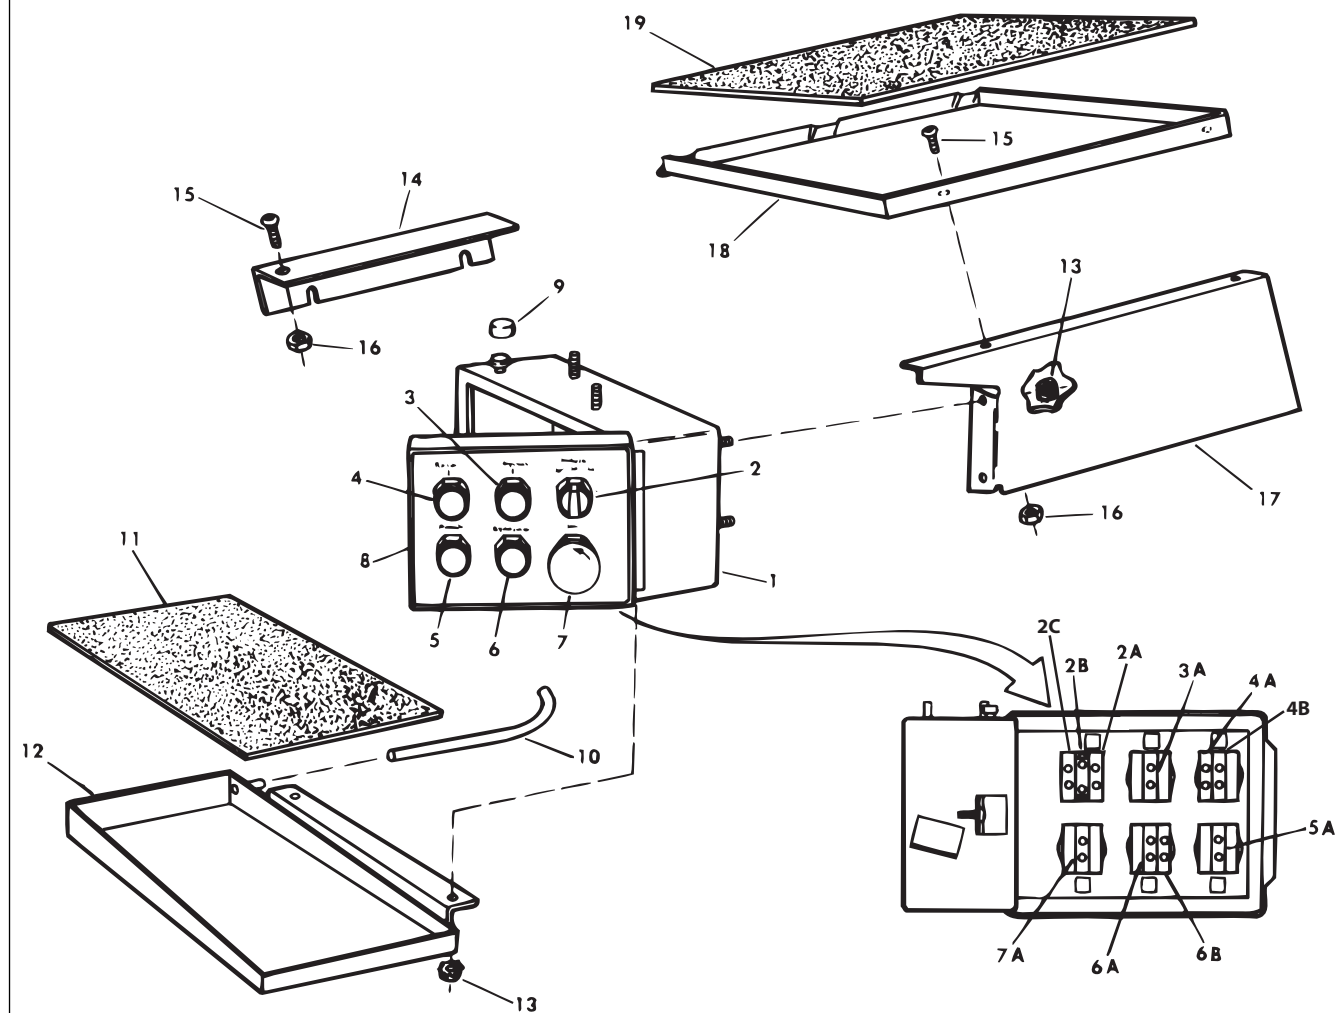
FIGURE Q - ELECTRICAL CONTROL ENCLOSURE (CE MACHINES)
